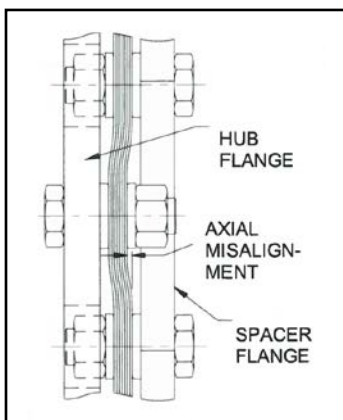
EXCESSIVE AXIAL MISALIGNMENT AT INSTALLATION
